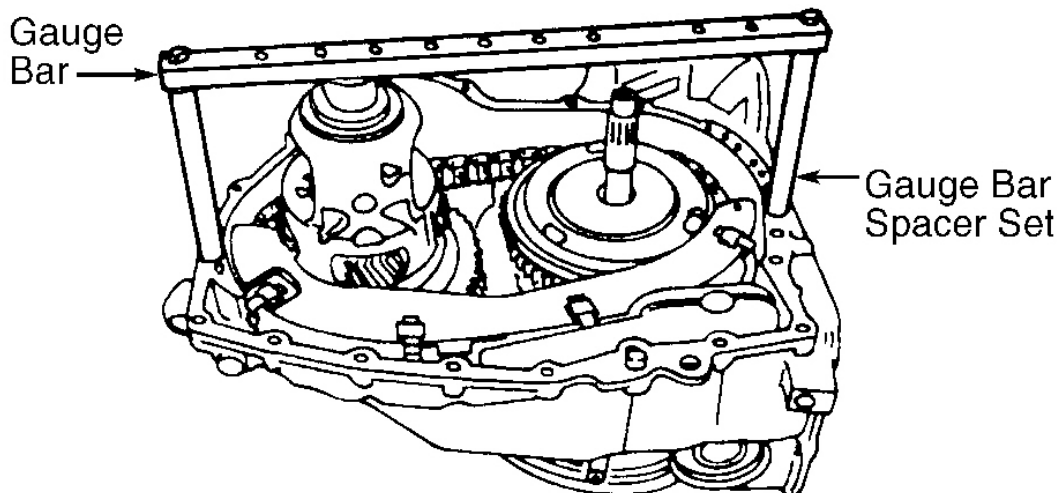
Measuring Reverse/Overdrive Ring Gear Height
